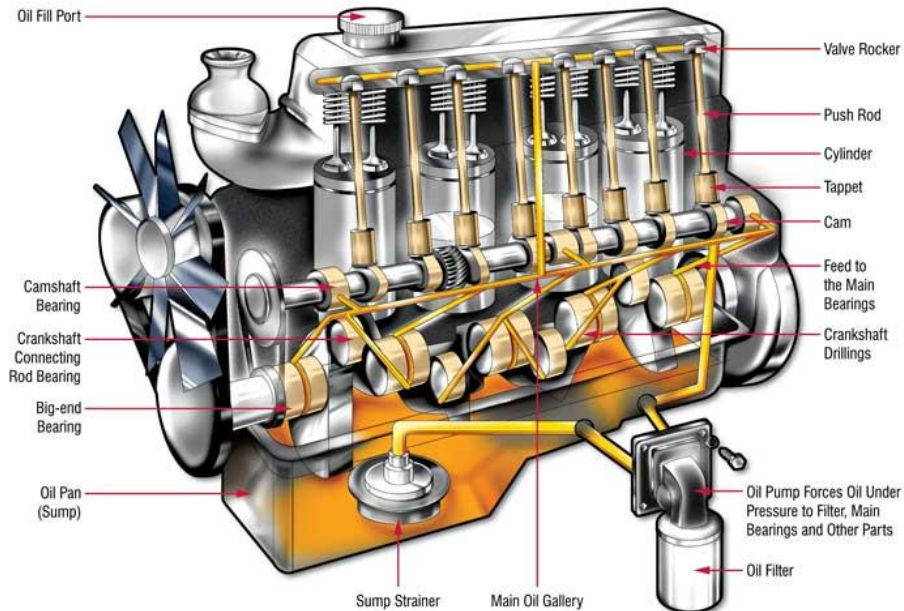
Oil delivery in Internal Combustion Engine – scheme. (12)
